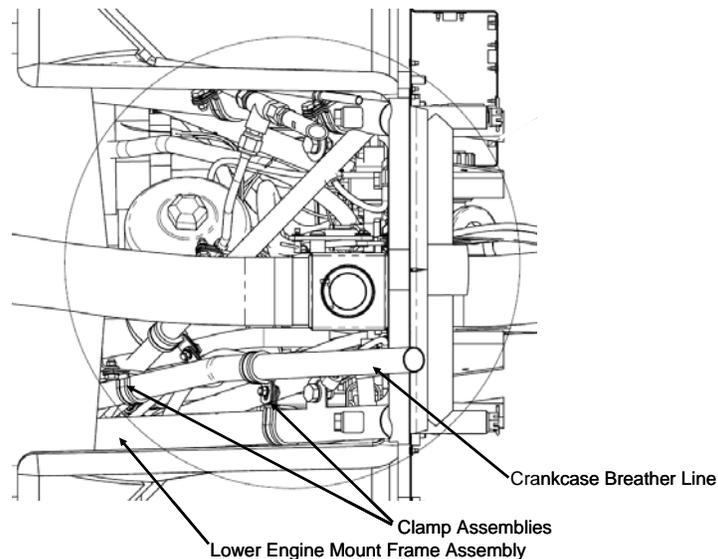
Crankcase Direct Breather Line Clamp Installation
